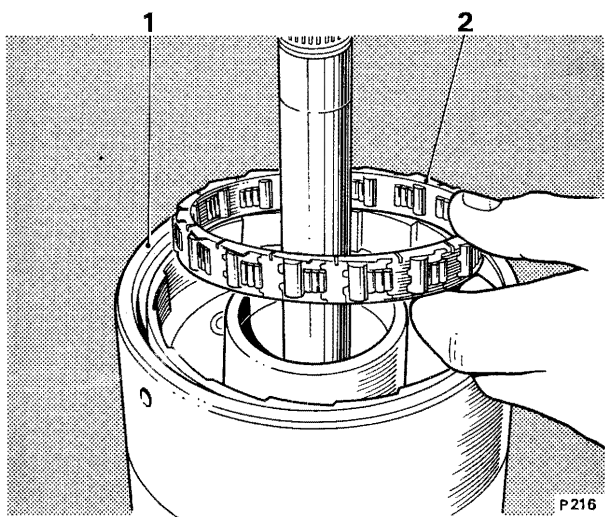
FITTING THE ROLLER CLUTCH ASSEMBLY TO THE REACTION CARRIER (ROLLER CLUTCH)
